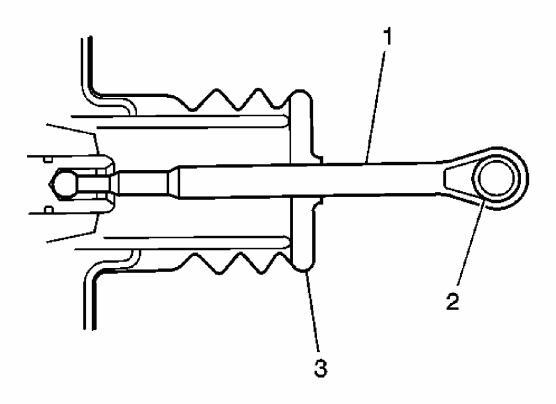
View of Brake Pedal Pushrod Courtesy of GENERAL MOTORS CORP.
